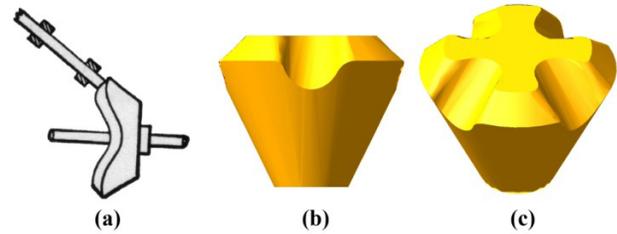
(a) Conceptual bevel cam. (b) Side view of the bevel cam. (c) Isometric view of the bevel cam.
